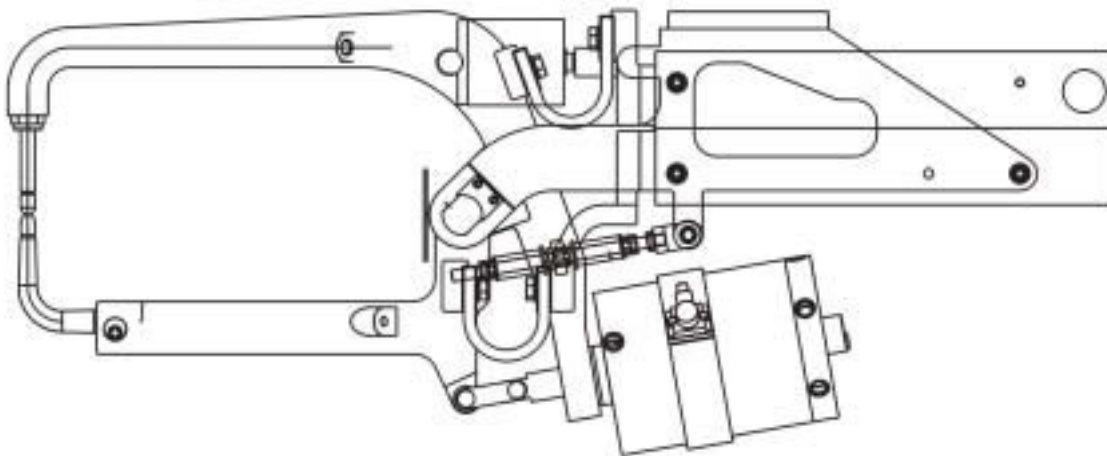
Robot Style, Pinch-Type Gun w/Transformer
